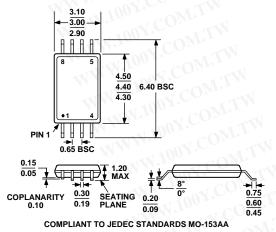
8-Lead Thin Shrink Small Outline Package [TSSOP) (RU-8) Dimensions shown in millimeters
